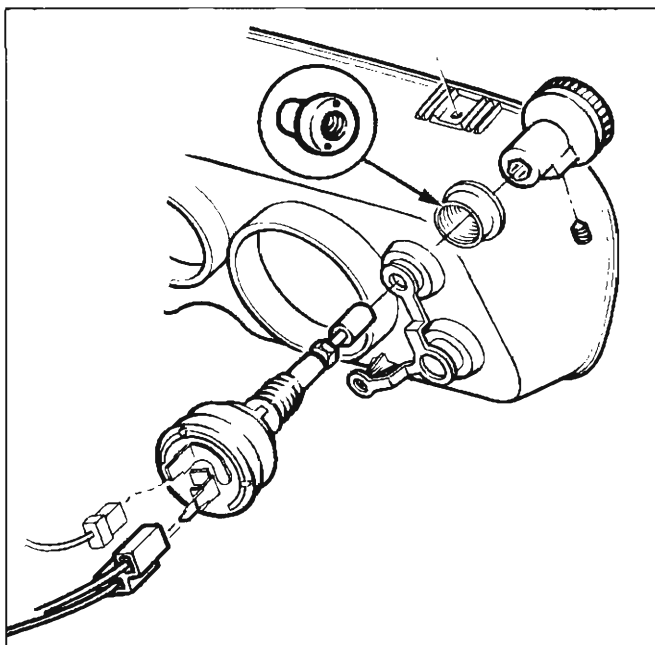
Windshield Wiper Switch (Chevelle Shown)
